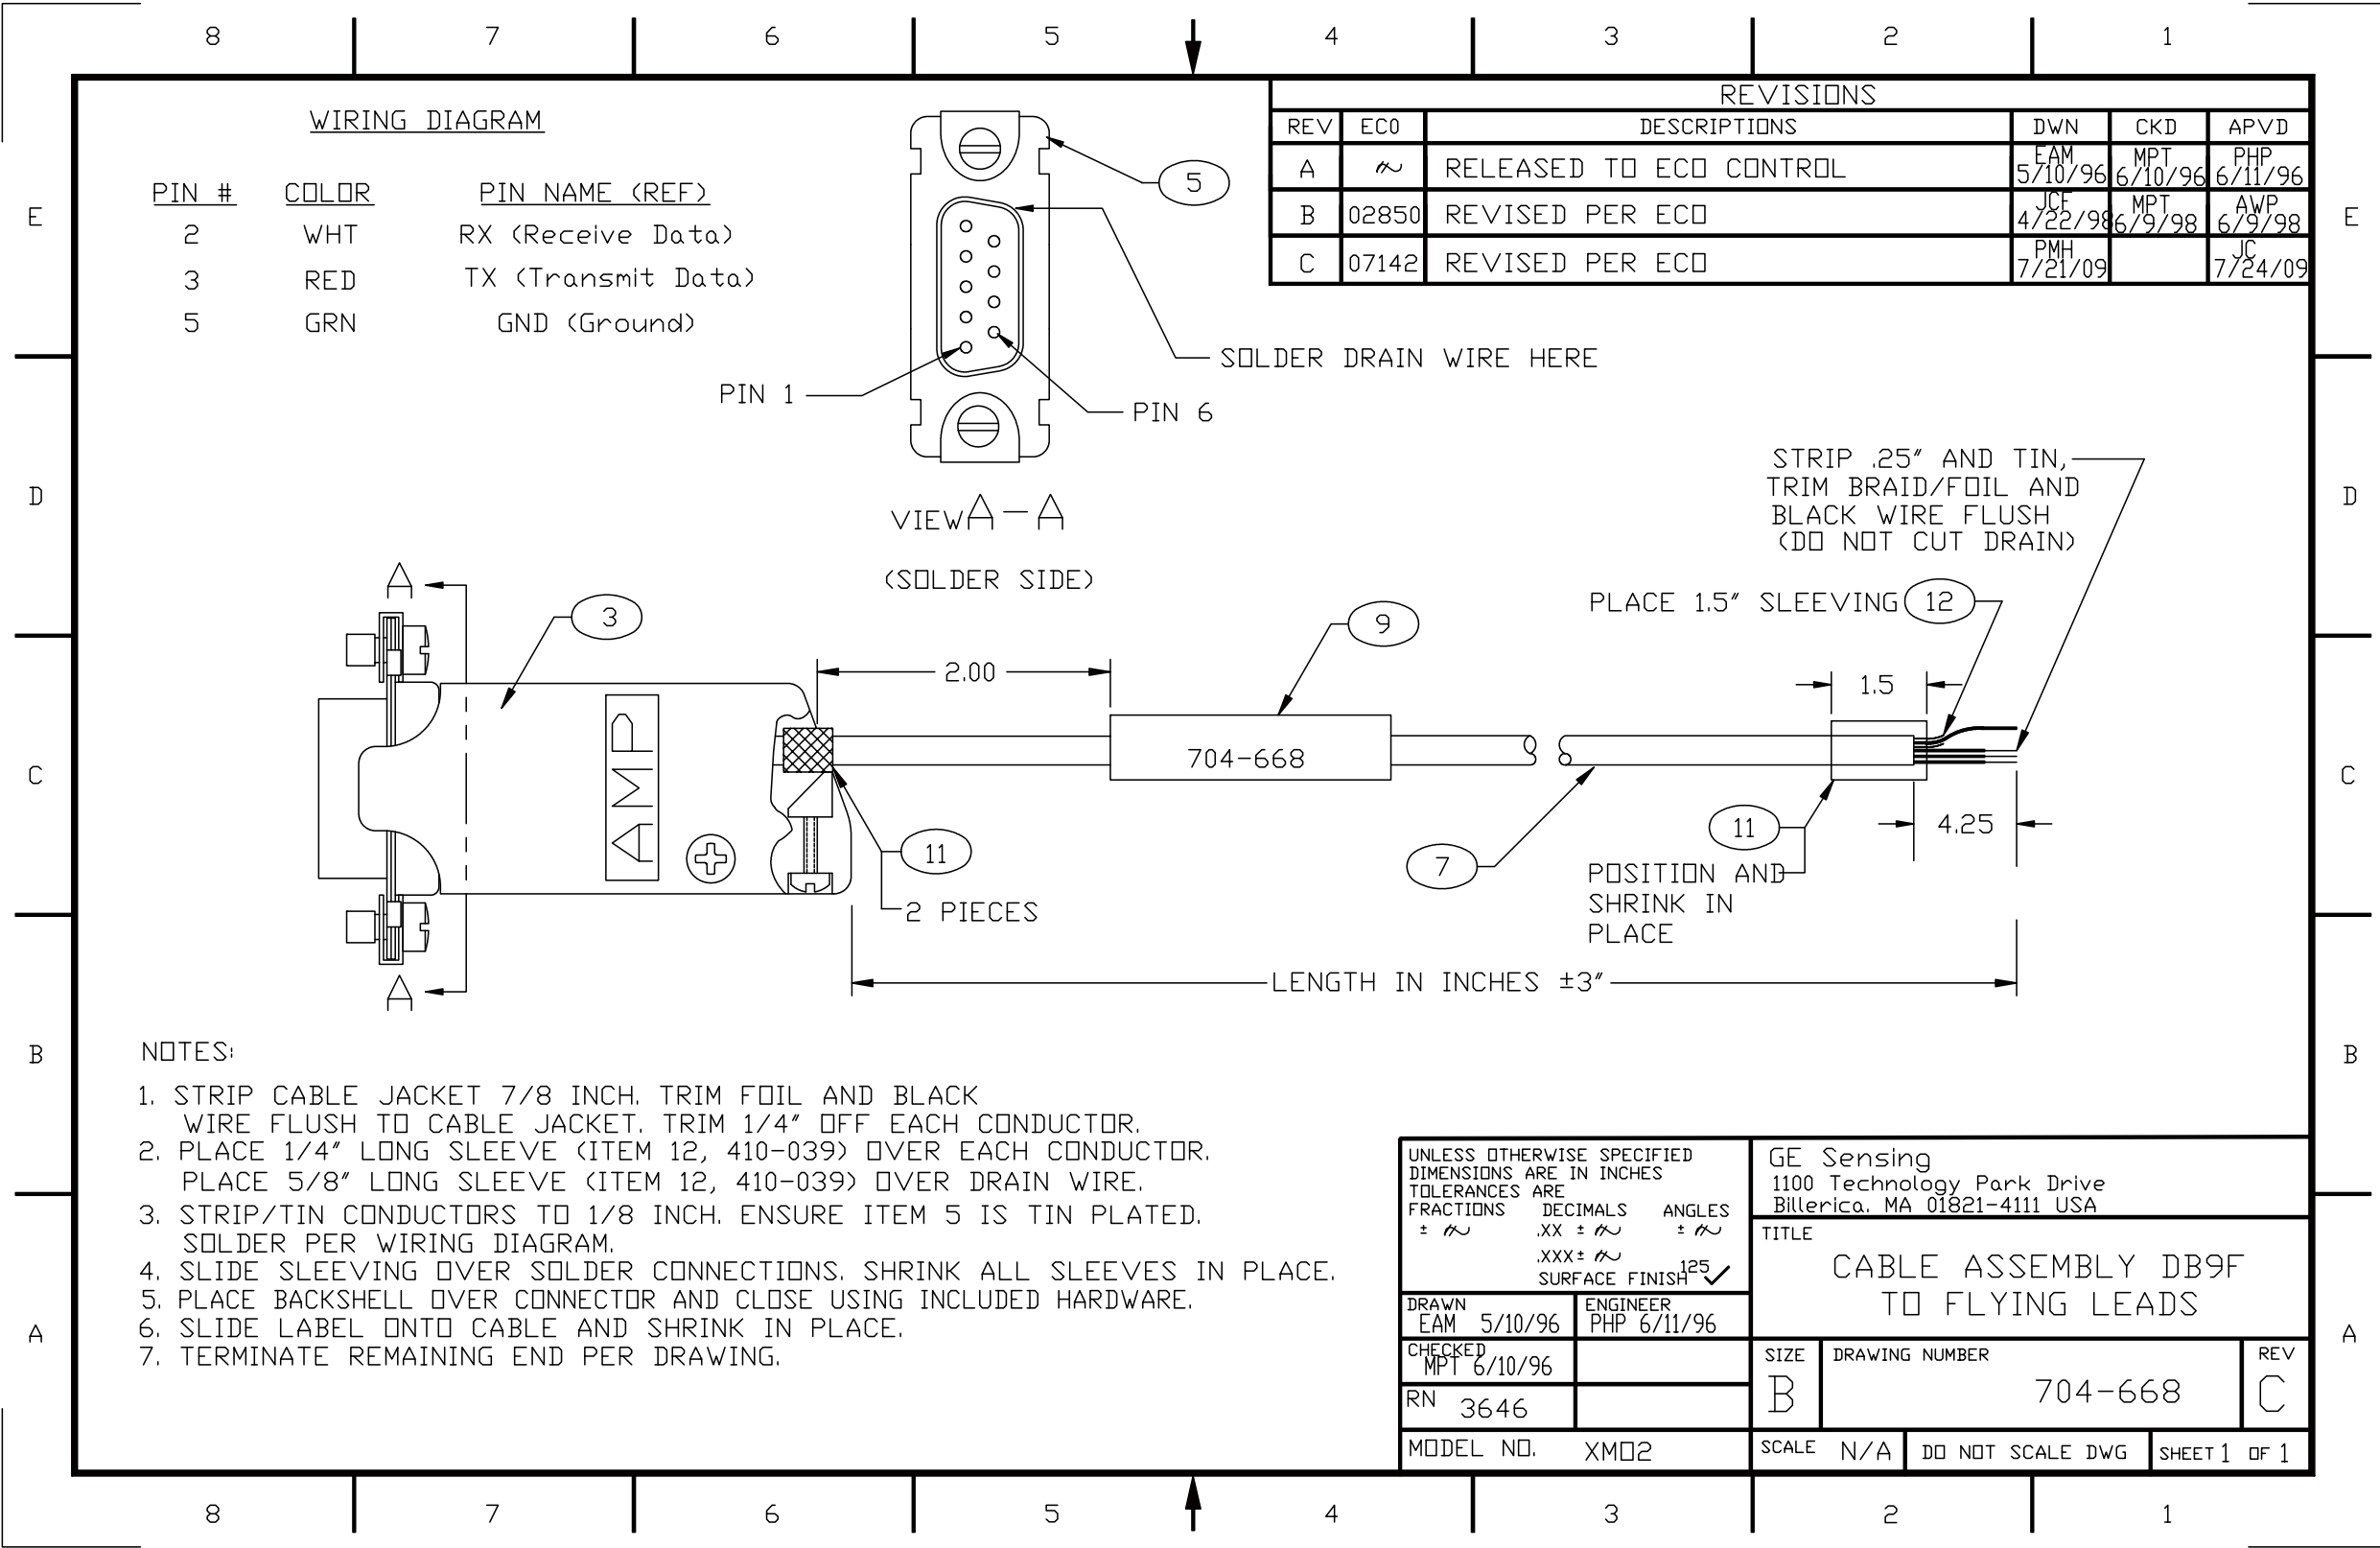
RS232 Cable Assembly (Drawing 704-668_rev C)
